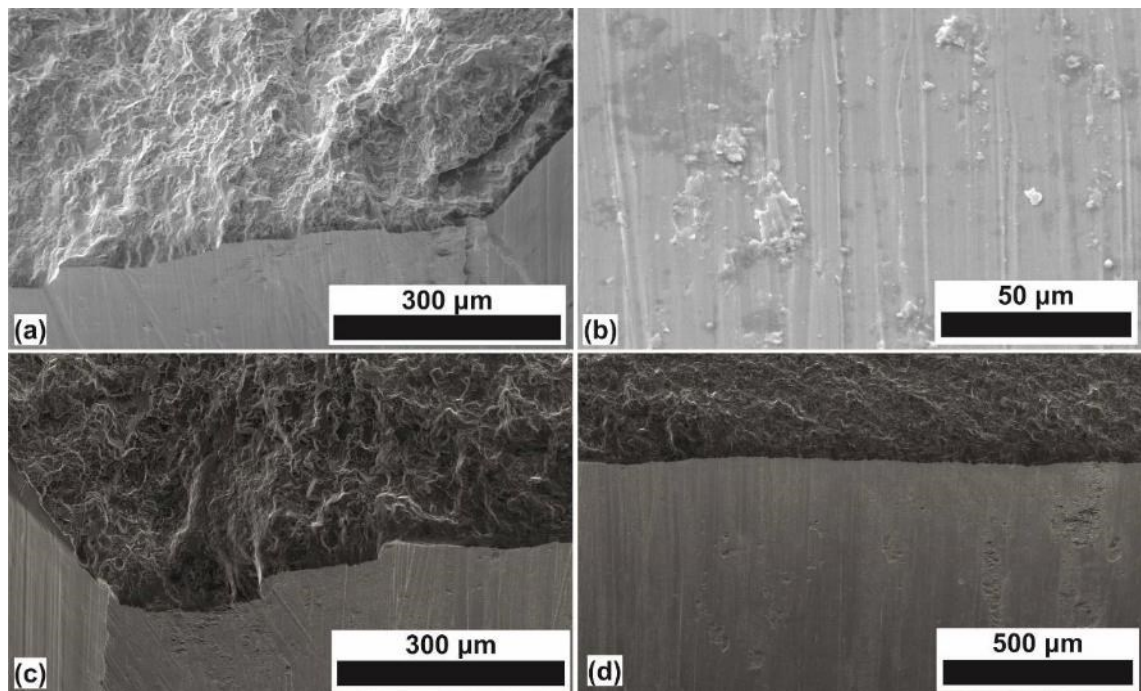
High cycle failure – Machined surfaces; a) & b) Specimen 1-1 @ 3165947 cycles; c) & d) Specimen 1-4 @ 2690063 cycles
